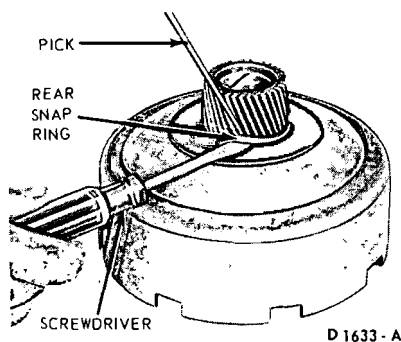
Removing or Installing Sun Gear Rear Snap Ring
